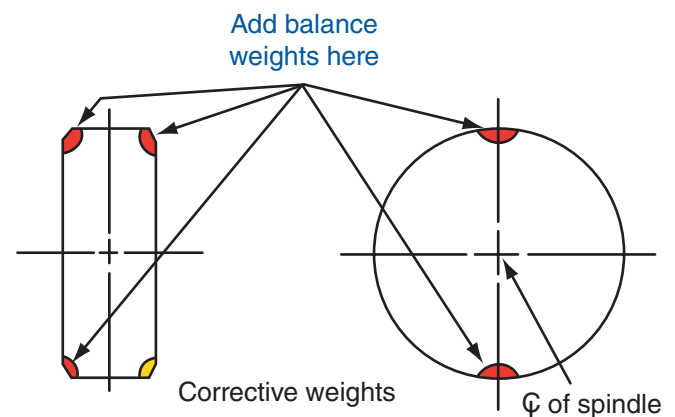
Adding a weight to counteract with the heavy spot of a tire and wheel assembly.
